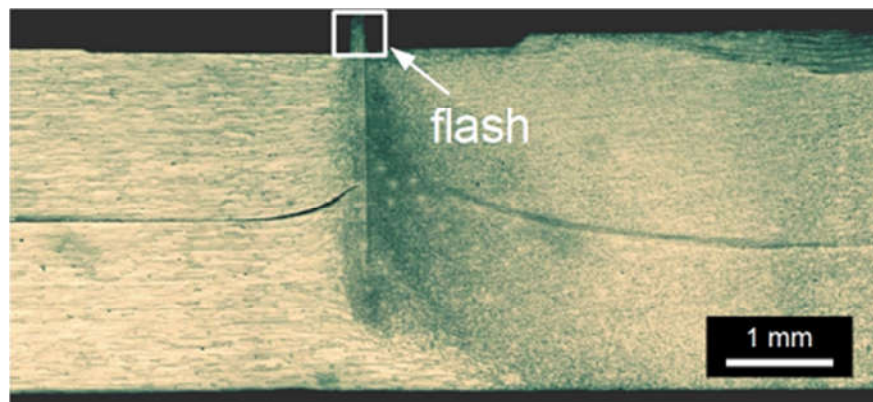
Presence of flash in a typical weld indicating the increasing of a slack between clamping ring's inner surface and sleeve's outer surface
